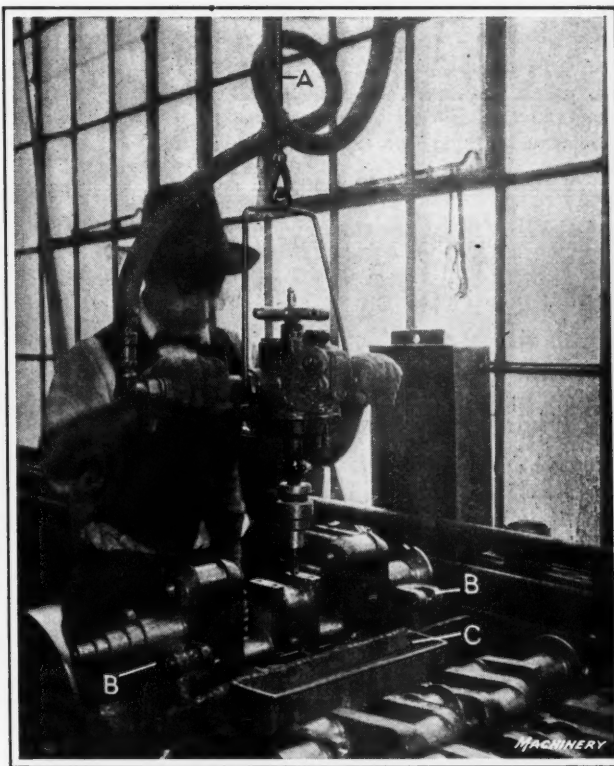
Conveniently Arranged Air-operated Tool for tapping Holes in the Counterweight Seats on Essex Crankshafts
